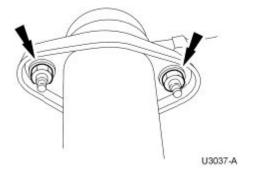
Locating Exhaust System Nuts Courtesy of FORD MOTOR CO.
